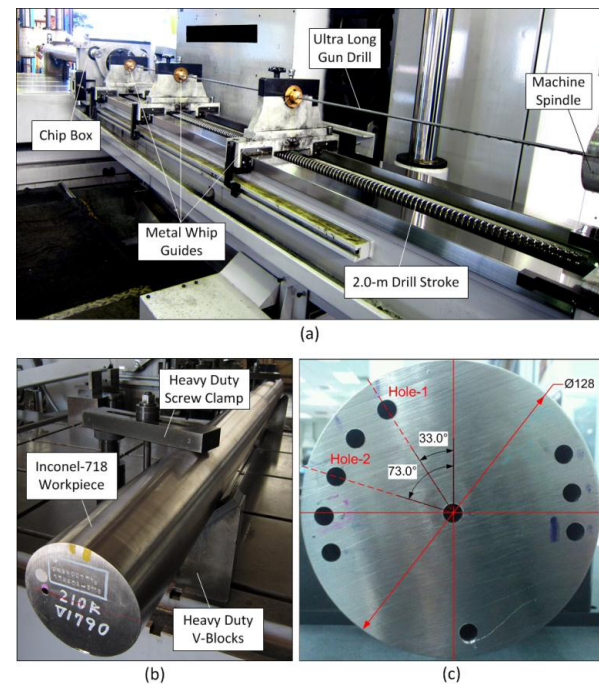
(a) Experimental setup; (b) Mounting of 2.0-m Inconel-718 workpiece; (c) Two holes, Hole-1 and Hole-2 being drilled.
